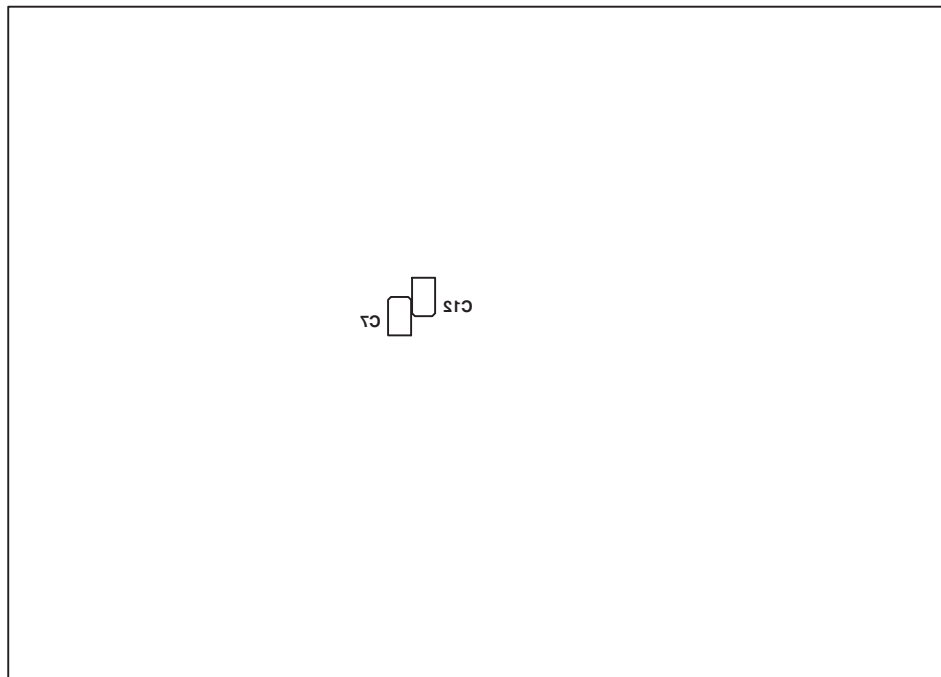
Silkscreen—Component Side View (Bottom Layer)
